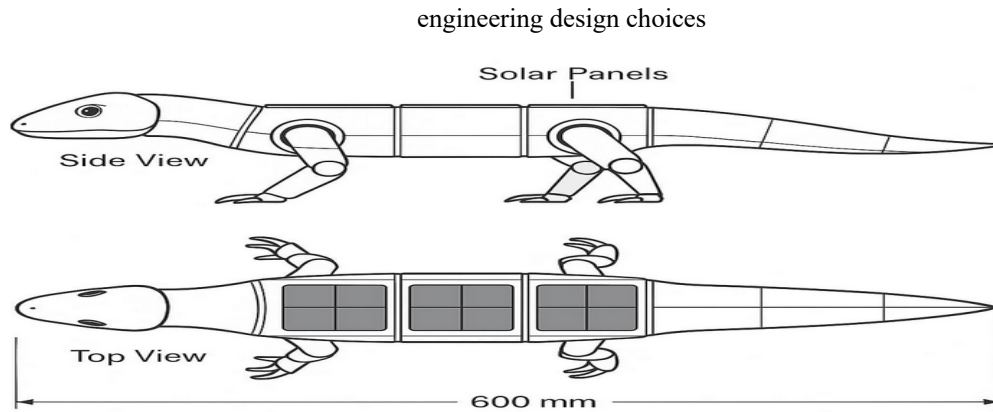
Full CAD Model of the Robot (Side + Top View)
